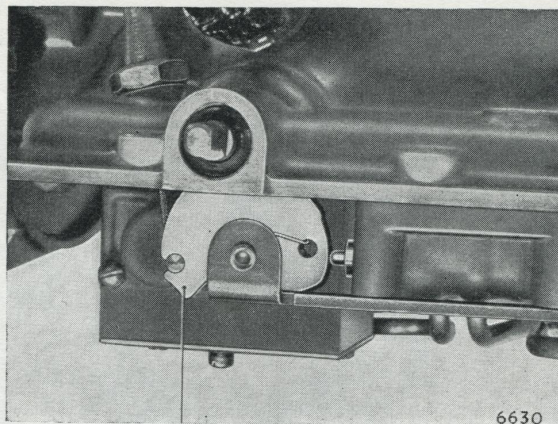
Position of downshift valve cam with carburettor throttle closed
